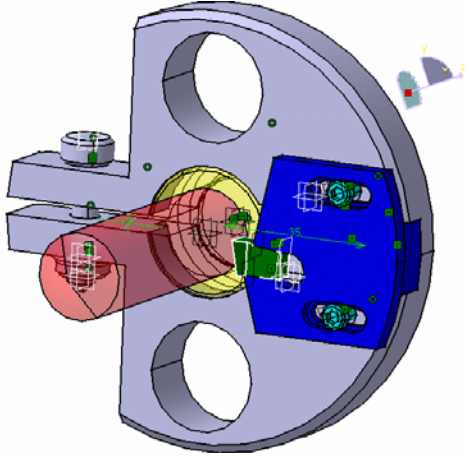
Chamfer with adjustable intermediate body and insert clamped by the elasticity of the tool body.
